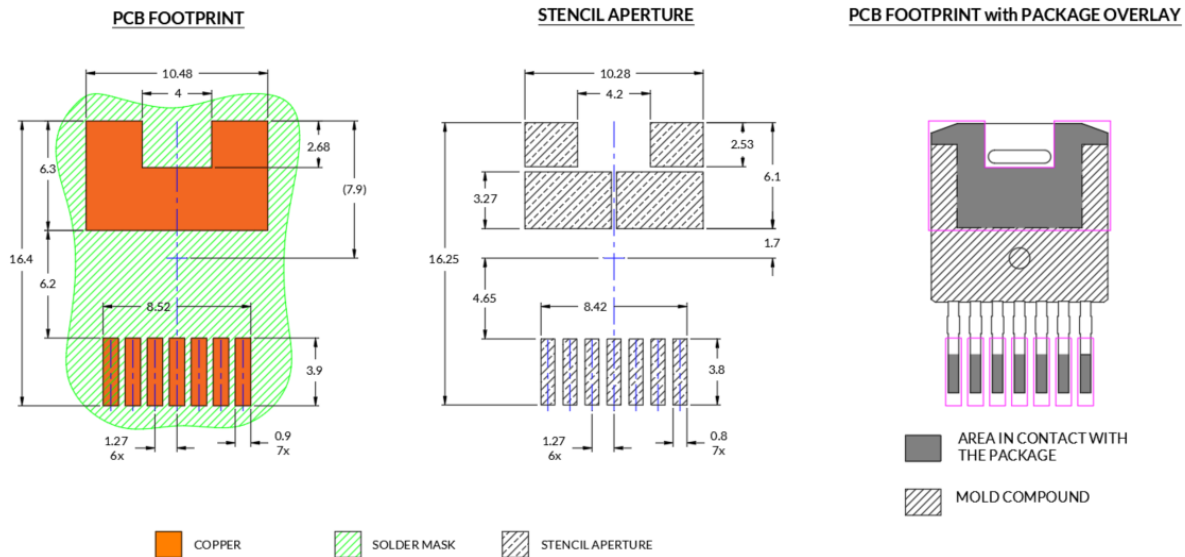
D2PAK-7L (a) PCB Land Pattern with Dimensions in Millimeters, (b) Footprint Overlaying Land Pattern Highlighting Area Within Land Pattern in Contact with Package Metal
